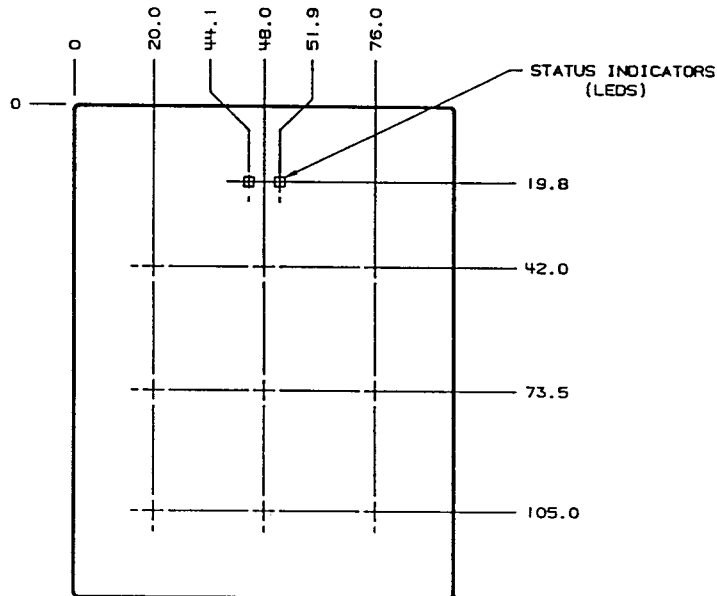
Front Panel 9 Component Gridwork, 2/8 Module
